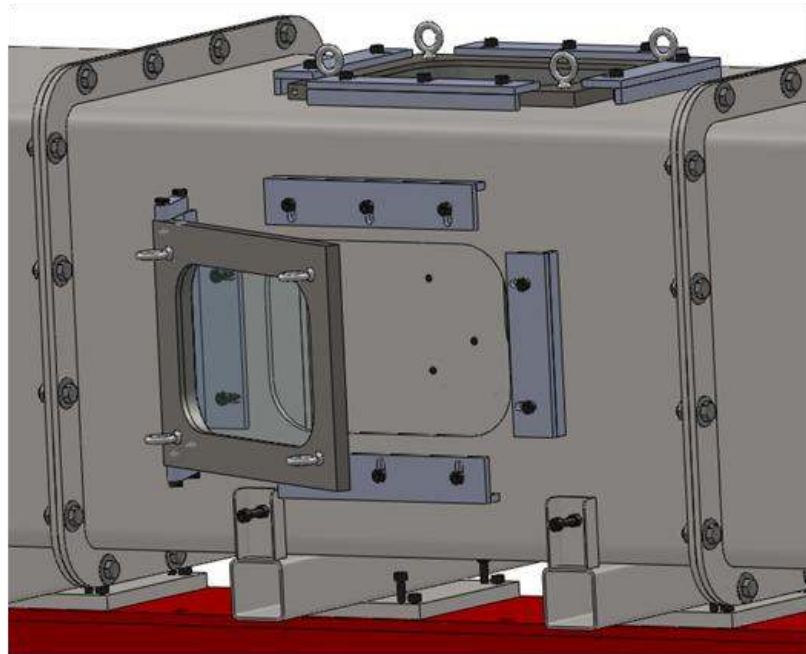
Test section of 28-inch shock tube. The side viewing windows open on hinges and are held closed with four sliding clamps. The top window is equipped with lifting rings for simple removal. A 1.5" thick sensor mounting plate is located on the opposite side of the front window. Experiment mounting is done using holes on the bottom of the test section.
